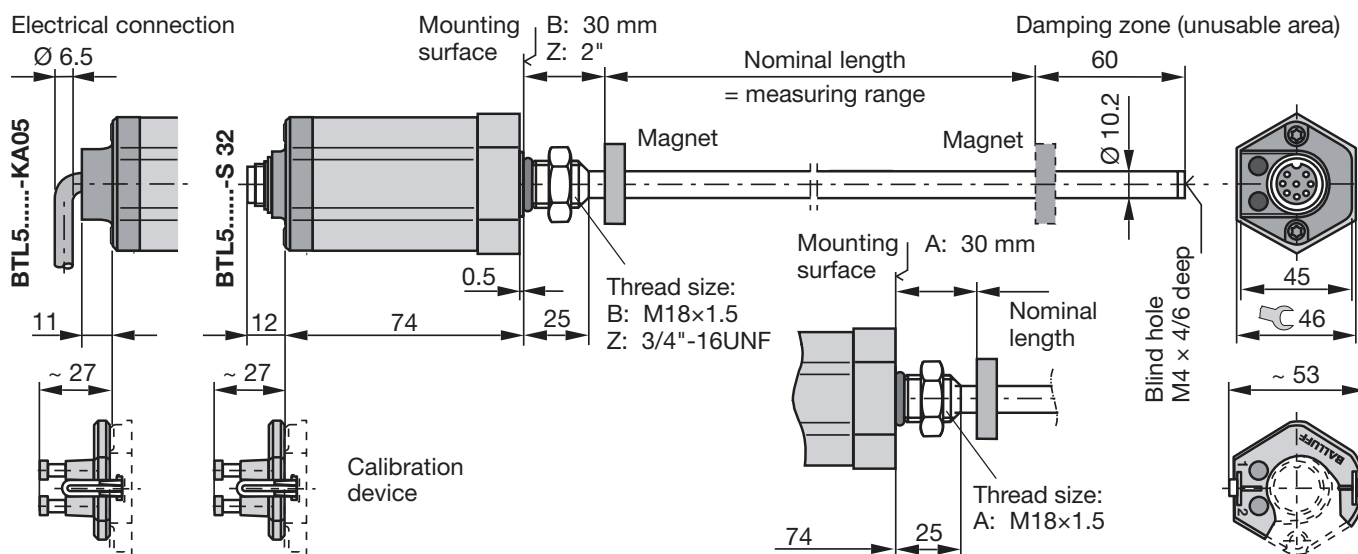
Transducer BTL5...A/B/Z, Dimensions
